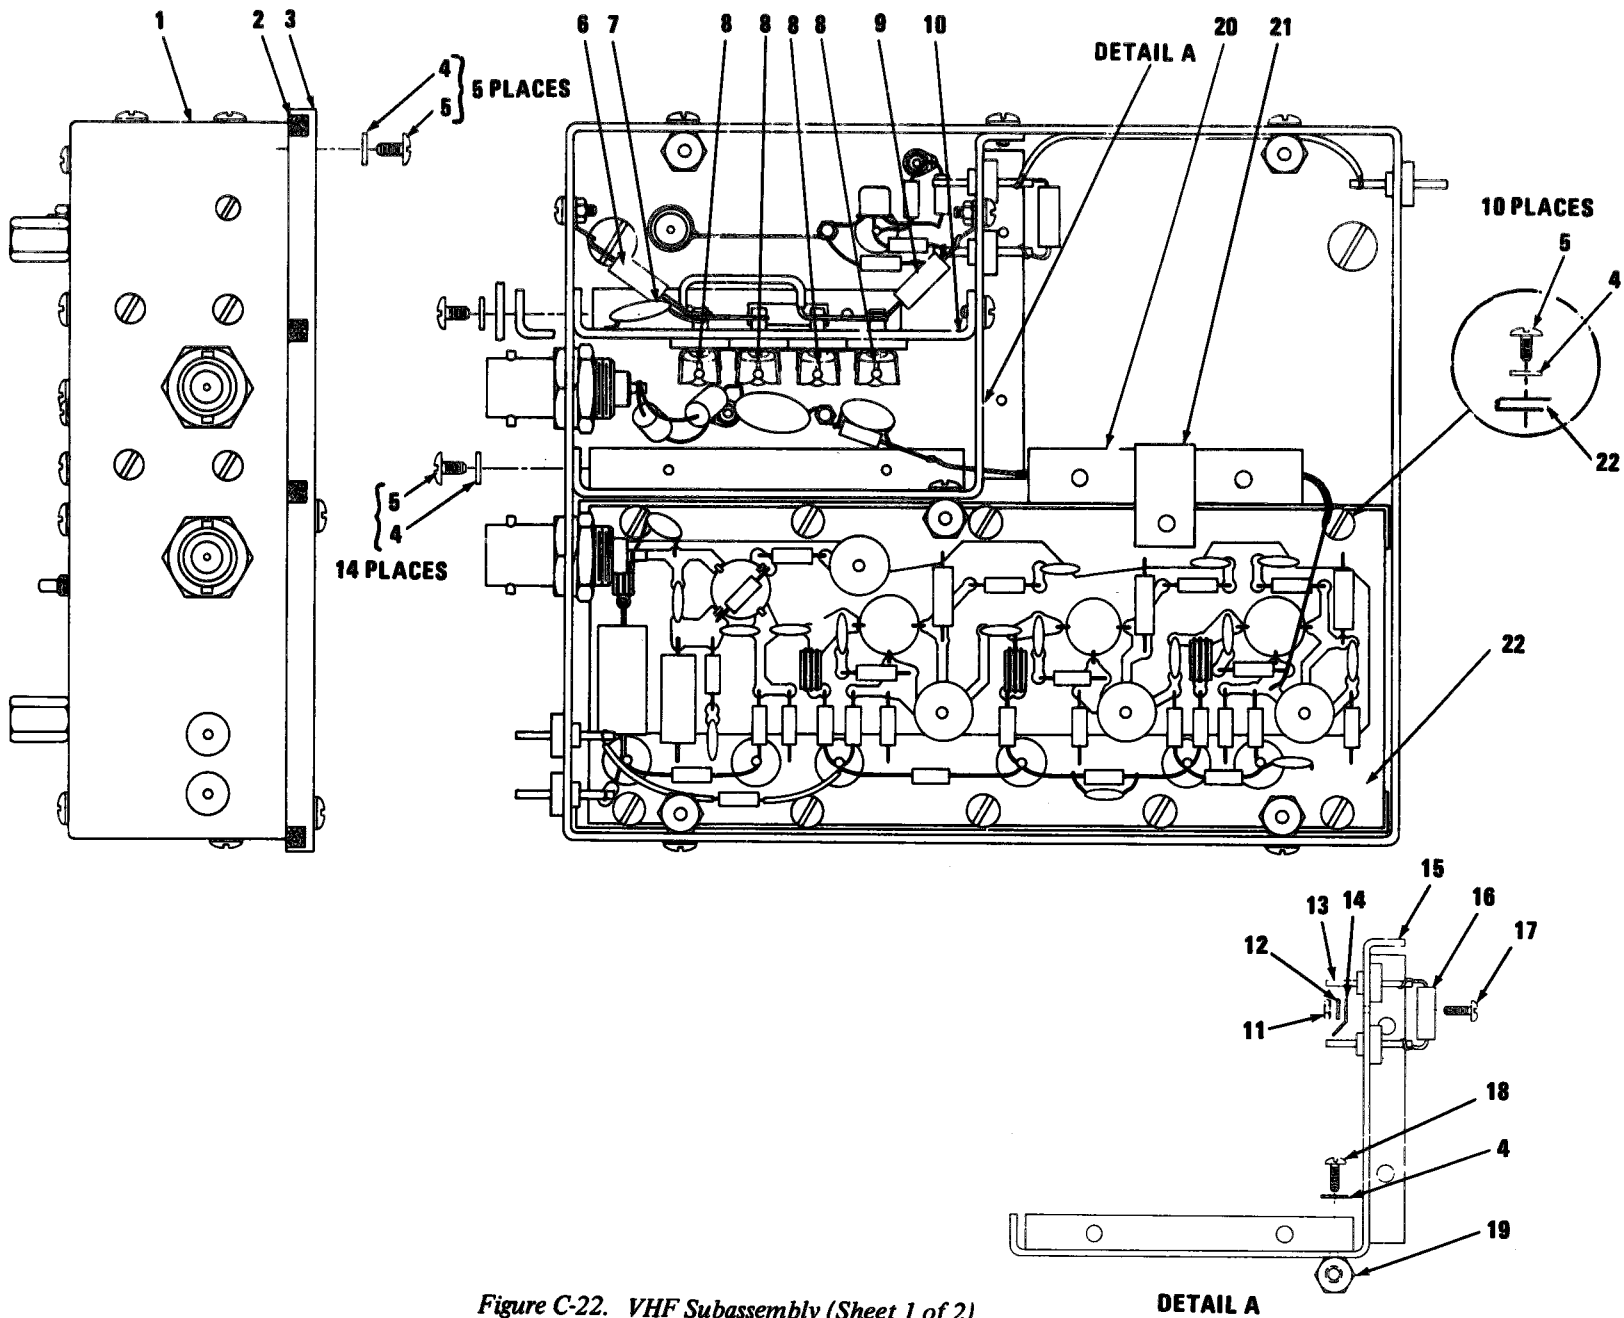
VHF Subassembly (Sheet 1 of 2)
